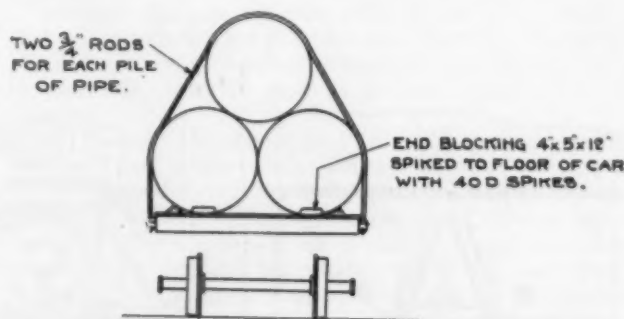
G—Loading Wrought Pipe 49 in. to 72 in. in Diameter on Flat Cars
